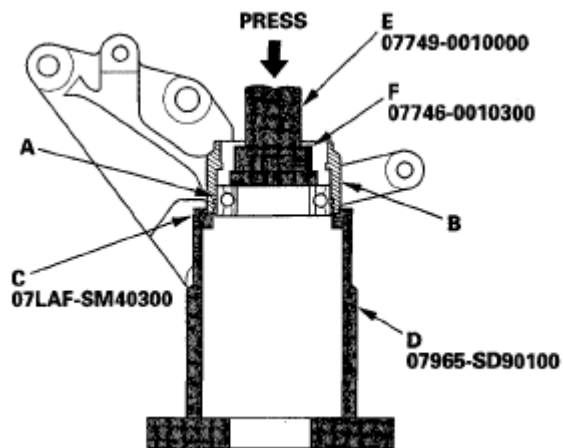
Identifying Intermediate Shaft Bearing Out Of Bearing Support
